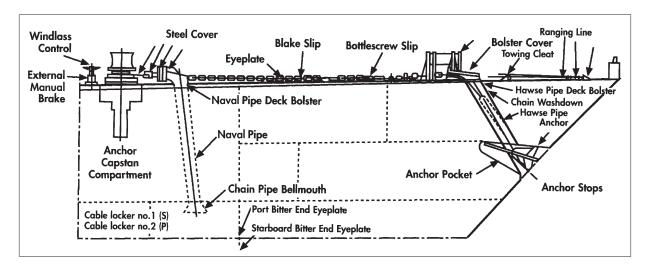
HALIFAX Class Anchor and Cable Arrangement (Side View)
